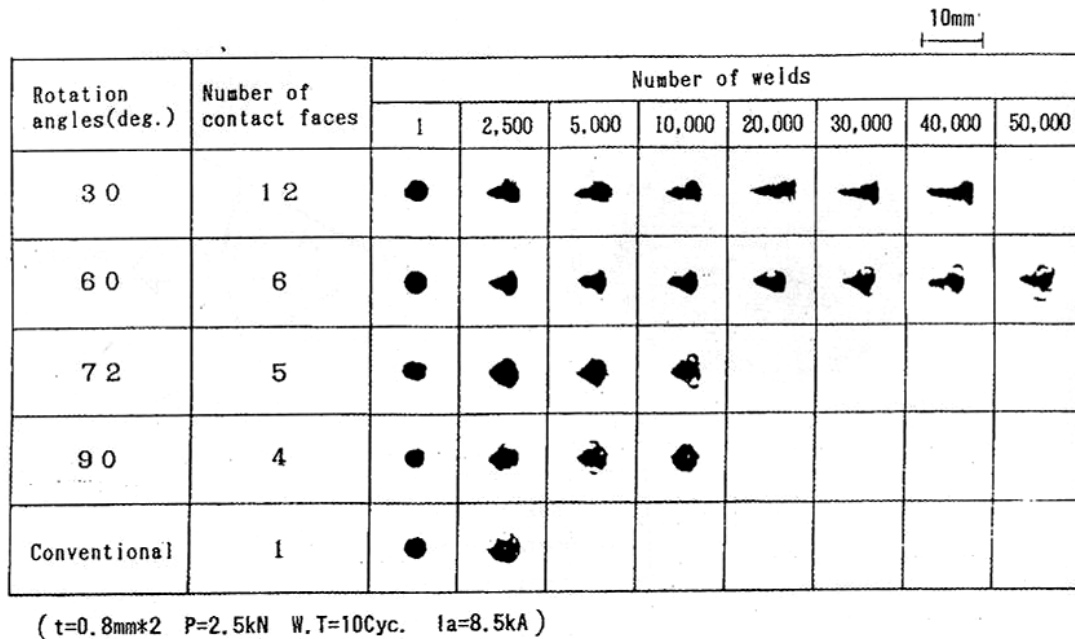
Electrode carbon tip imprints for varying rotation angles at progressing welds [27]
